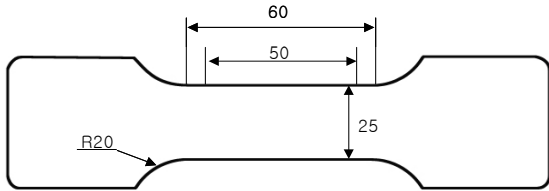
Dimension and shape of tensile specimen (unit : mm)
